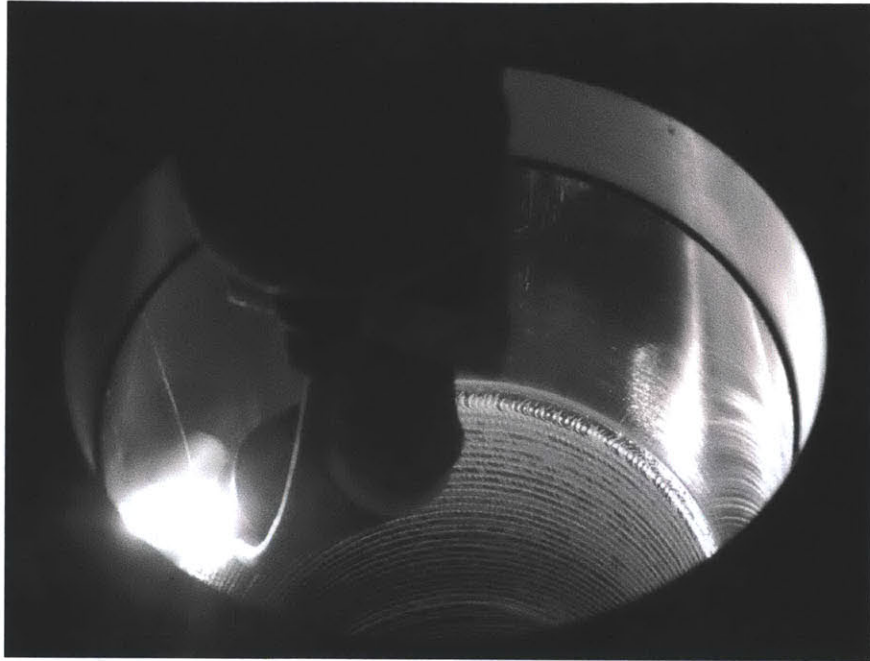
Weld overlay procedure of the ID-clad billet in process. The first pass of deposited material is visible at the back of the billet, while bare metal waiting to be weld-overlaid is visible at the front.
